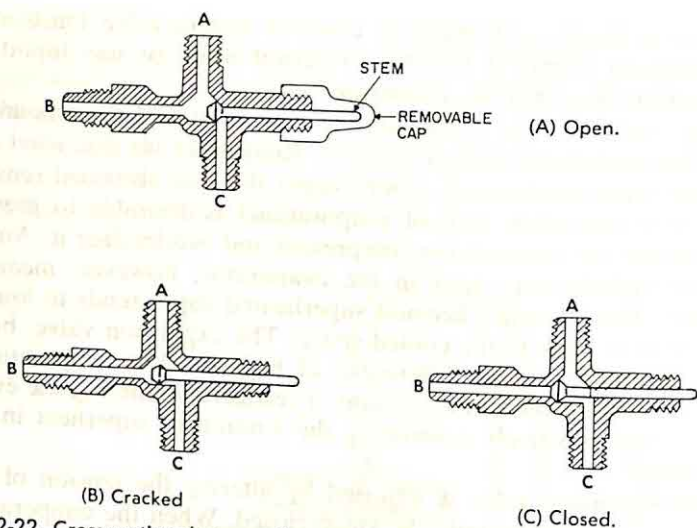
Cross-sectional views of a service valve in the three possible positions.
